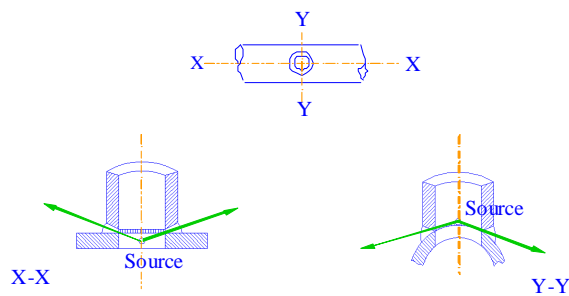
Example illustrating two sections of panoramic exposure for nozzle welds
